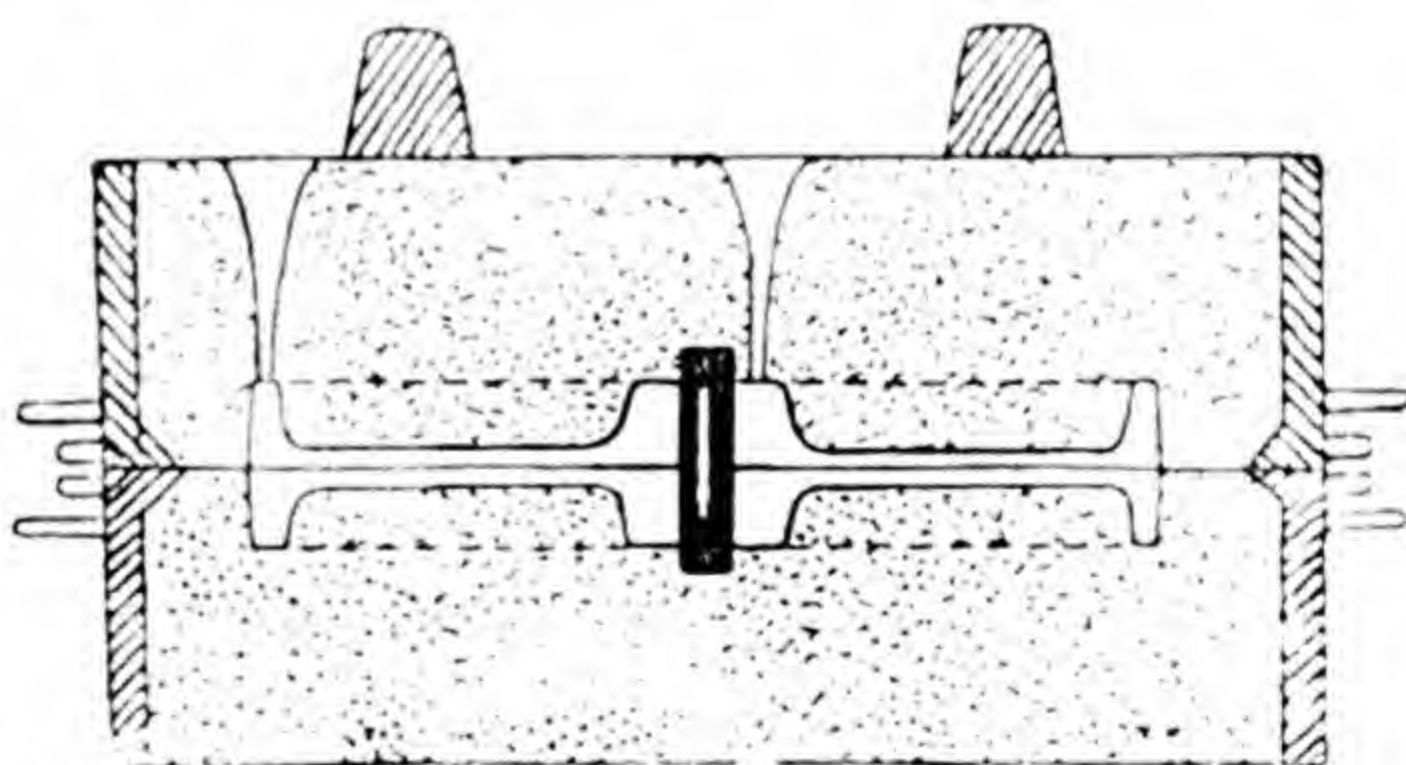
A mould made of sand, in a case, into which the molten metal is poured. One hole is to pour in the metal, the other to let out the air and gases from the mould.
